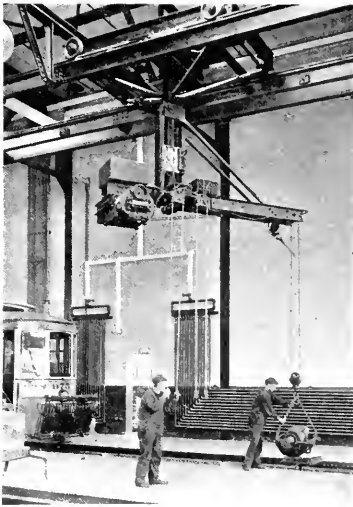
REMOVING MOTORS FROM PIT JACK BY OVERHEAD CRANE
